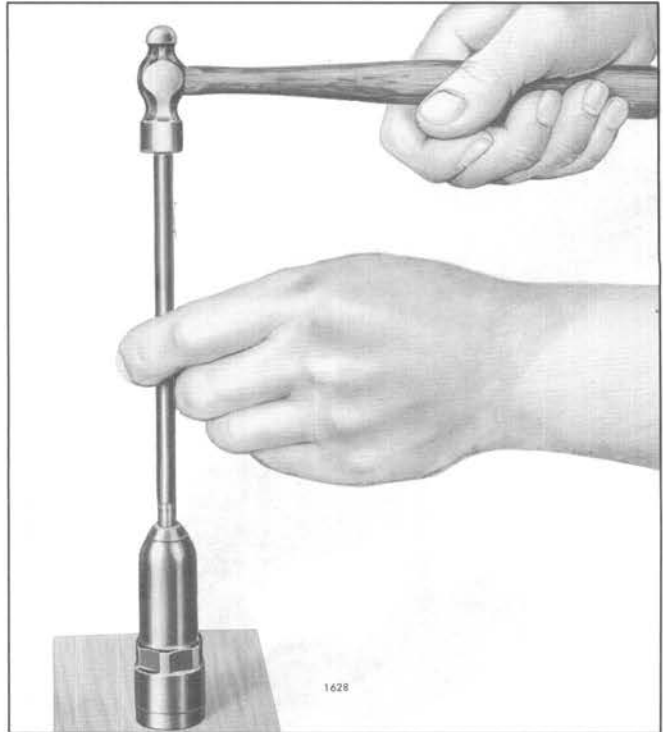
Removing Spray Tip from Injector Nut using Tool J 1291-02
